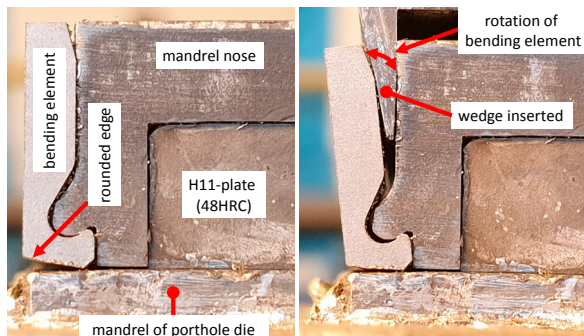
Adjustments of the inner mechanism for the second extrusion campaign.
